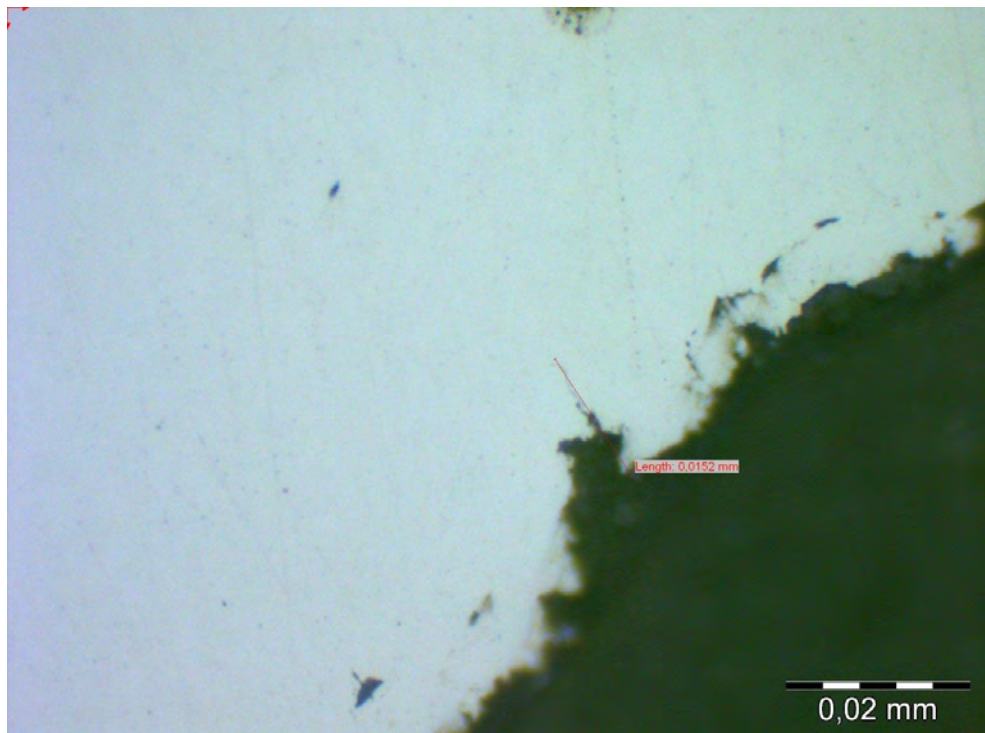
Crack at segment C, third ridge on barrel no. 14389
